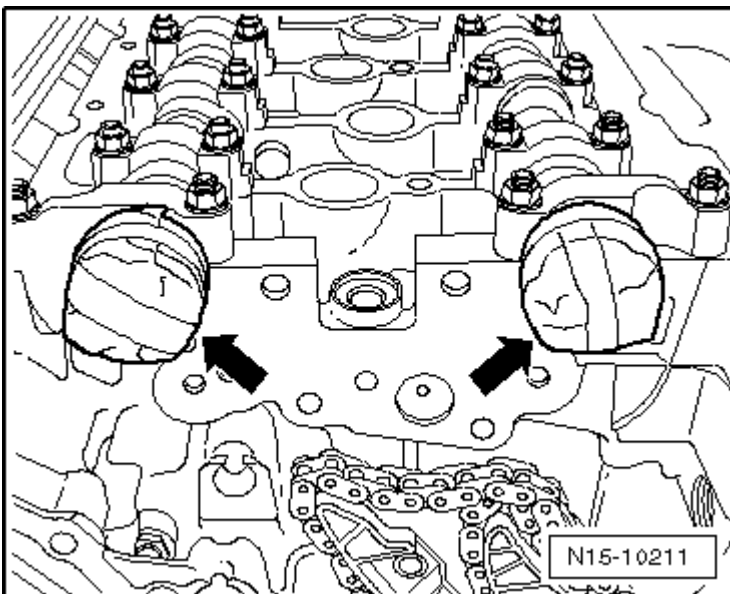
Covering Camshafts With Clean Paper Strips And Wrapping Ends With Adhesive Tape
